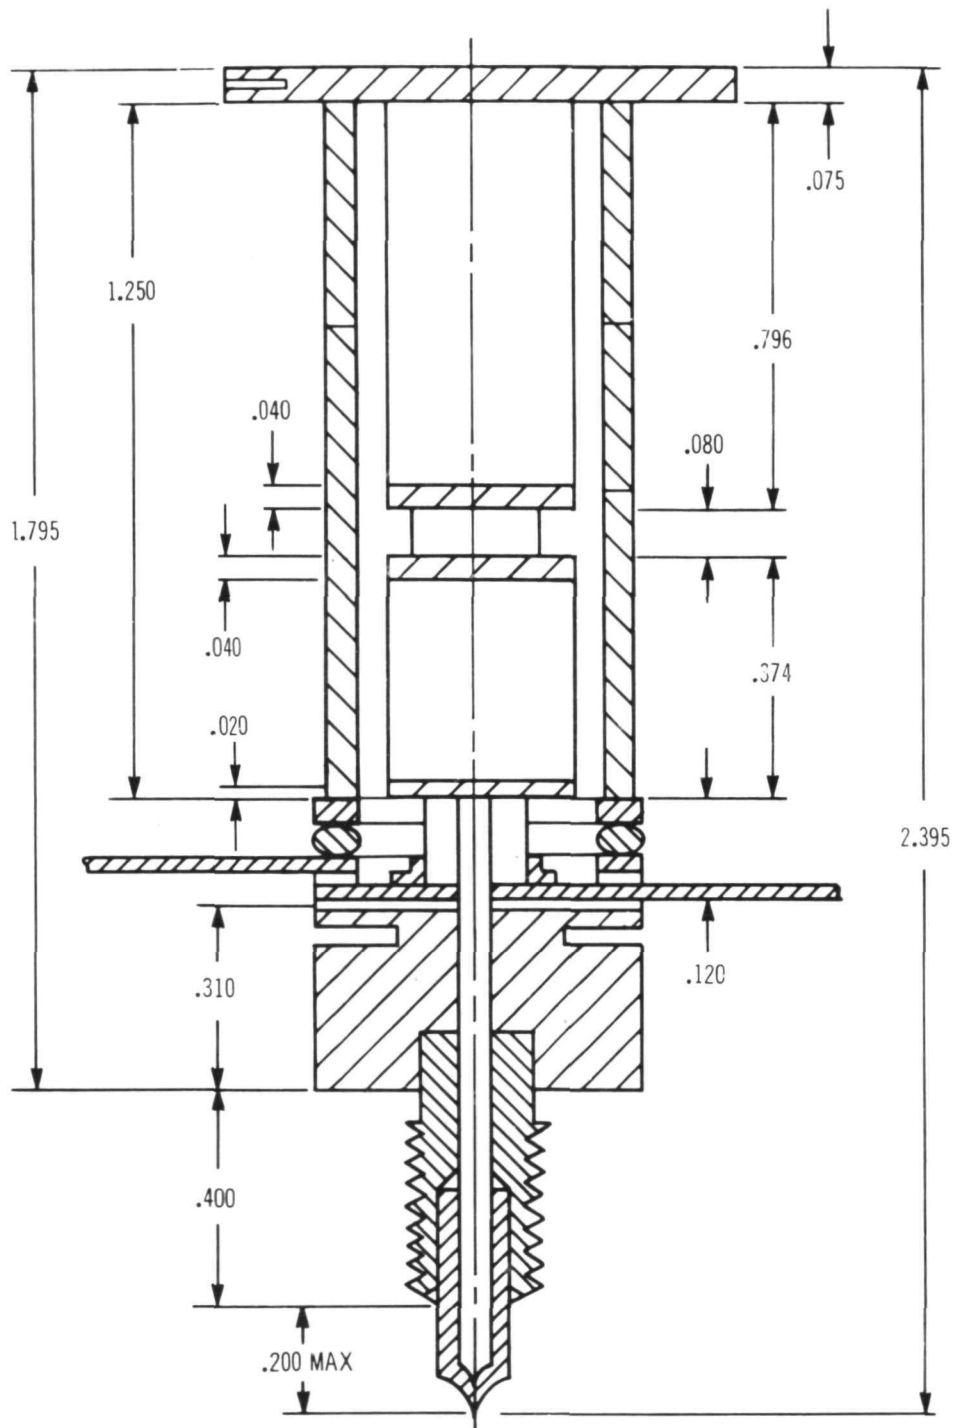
Hybrid Thermo couple Assembly - Design BX - 3
